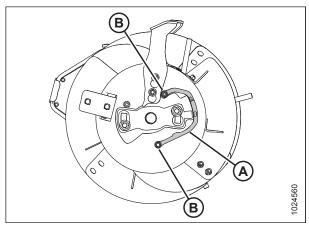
Indicator Plate Installed on Right End of Feed Auger
